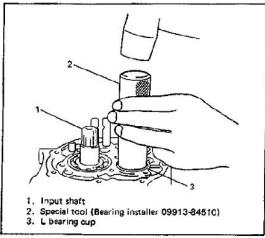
A-76 Seating Counter Shaft L Bearing Cup
